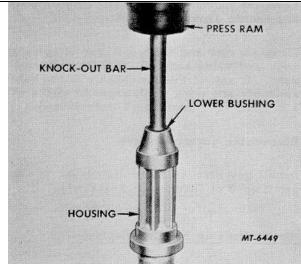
Pressing Out Upper Bushing Using Knock-Out Bar
